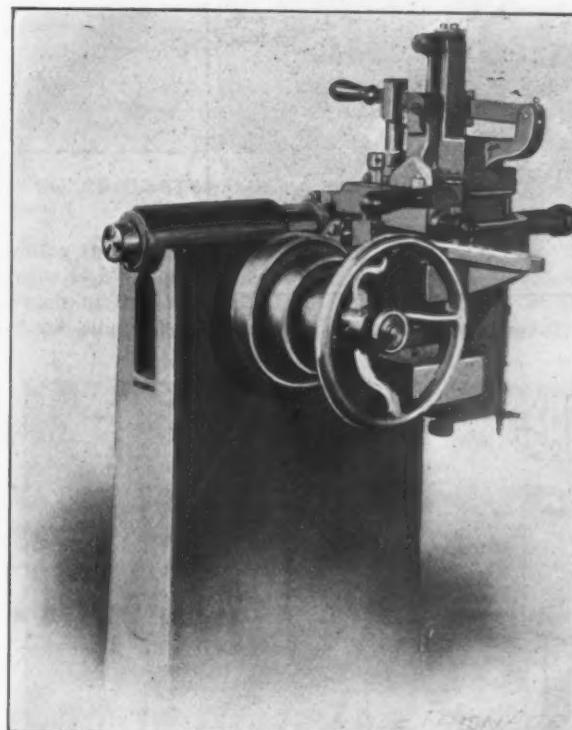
The Mold Parts Clamped and the Machine Ready to Use.
